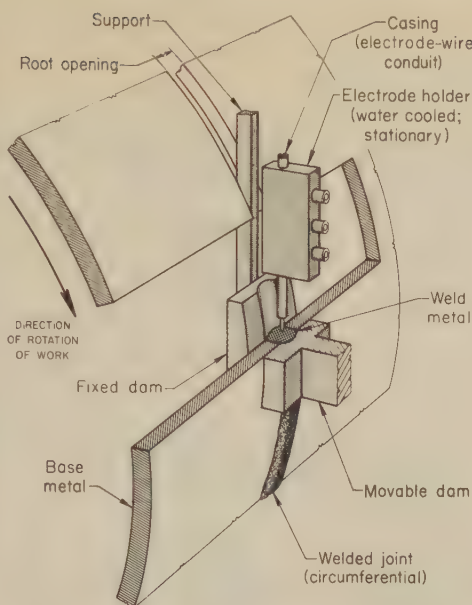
Typical setup for circumferential (girth) welding by the electrogas process
